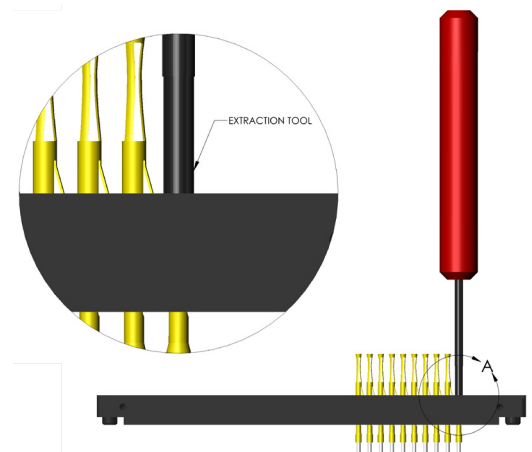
Figure C. Ensure that the tool is kept perpendicular to the module face to avoid damage to the contact or tool.
